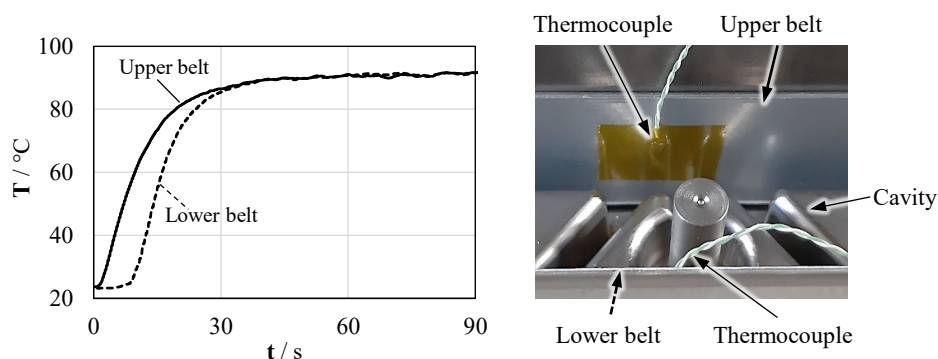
Measurement of belt temperatures after fixation in molding tool and before insertion of GMT
